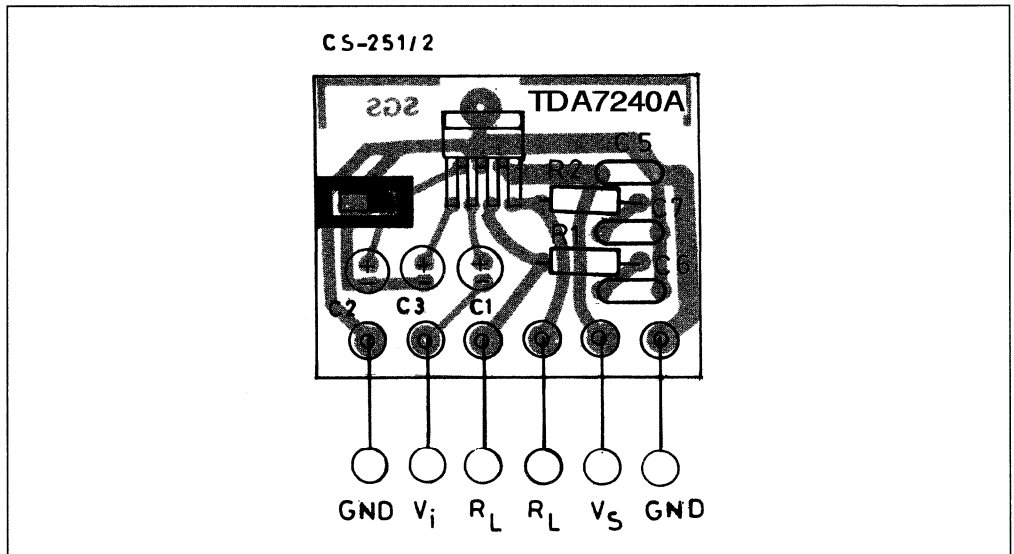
P.C. Board and Components layout of the Circuit of Fig. 1.
